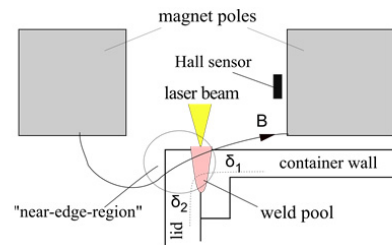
Scheme of the EM weld pool control for partial penetration welding of the lid to the container wall.
